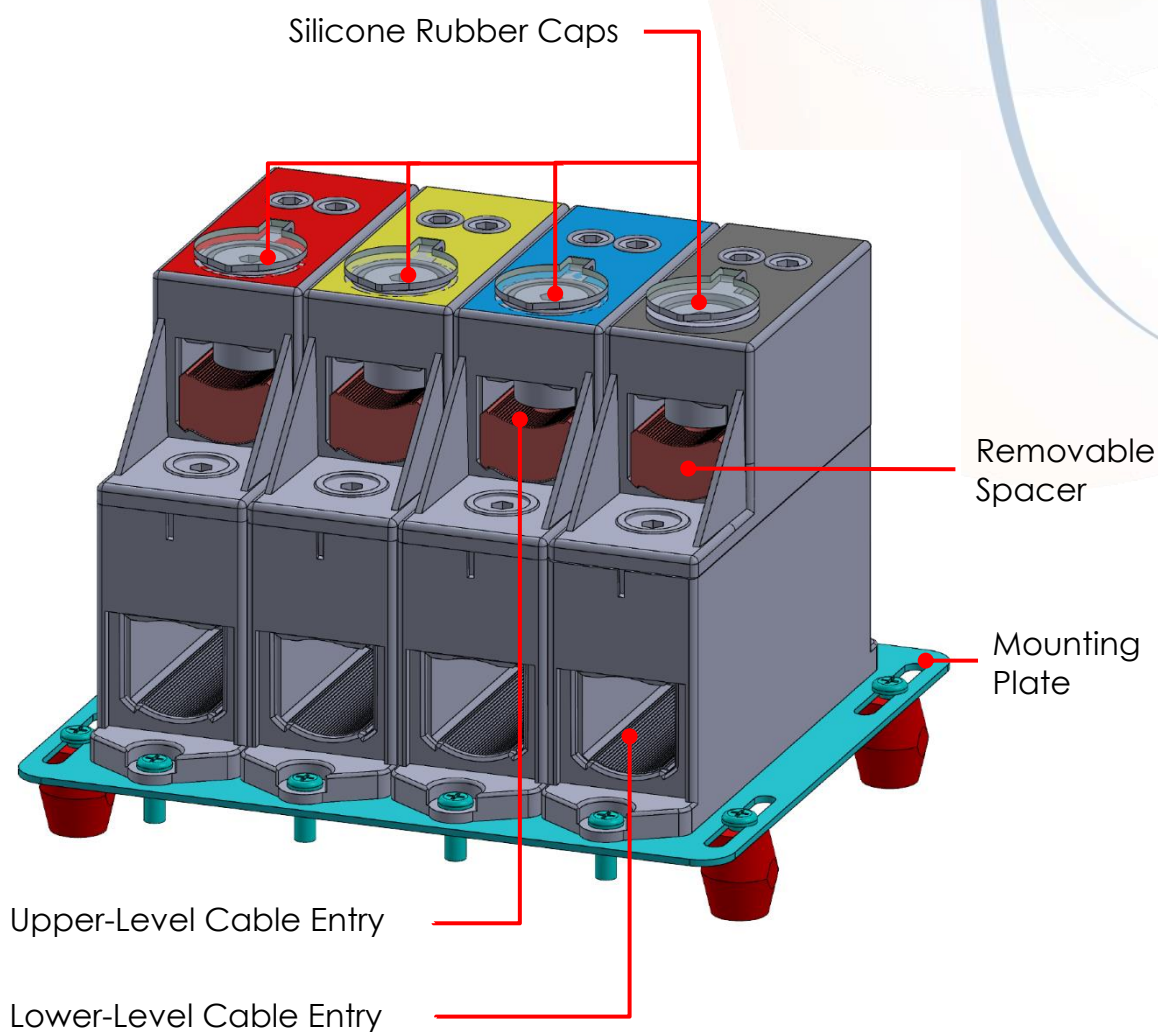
Perspective, Layout, and Technical Drawings of 1-Pole, Incoming (SEC) Terminal Block for Double-Meterbox with Steel Enclosure
